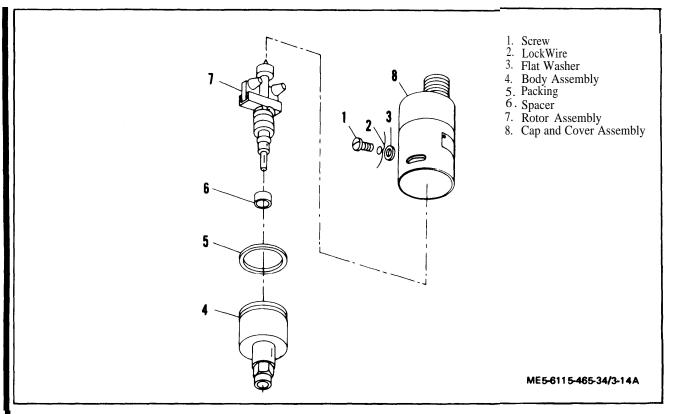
Speed Switch. Exploded View Effective with Serial No. RZ70001 and KZ027251 thru KZ027520
